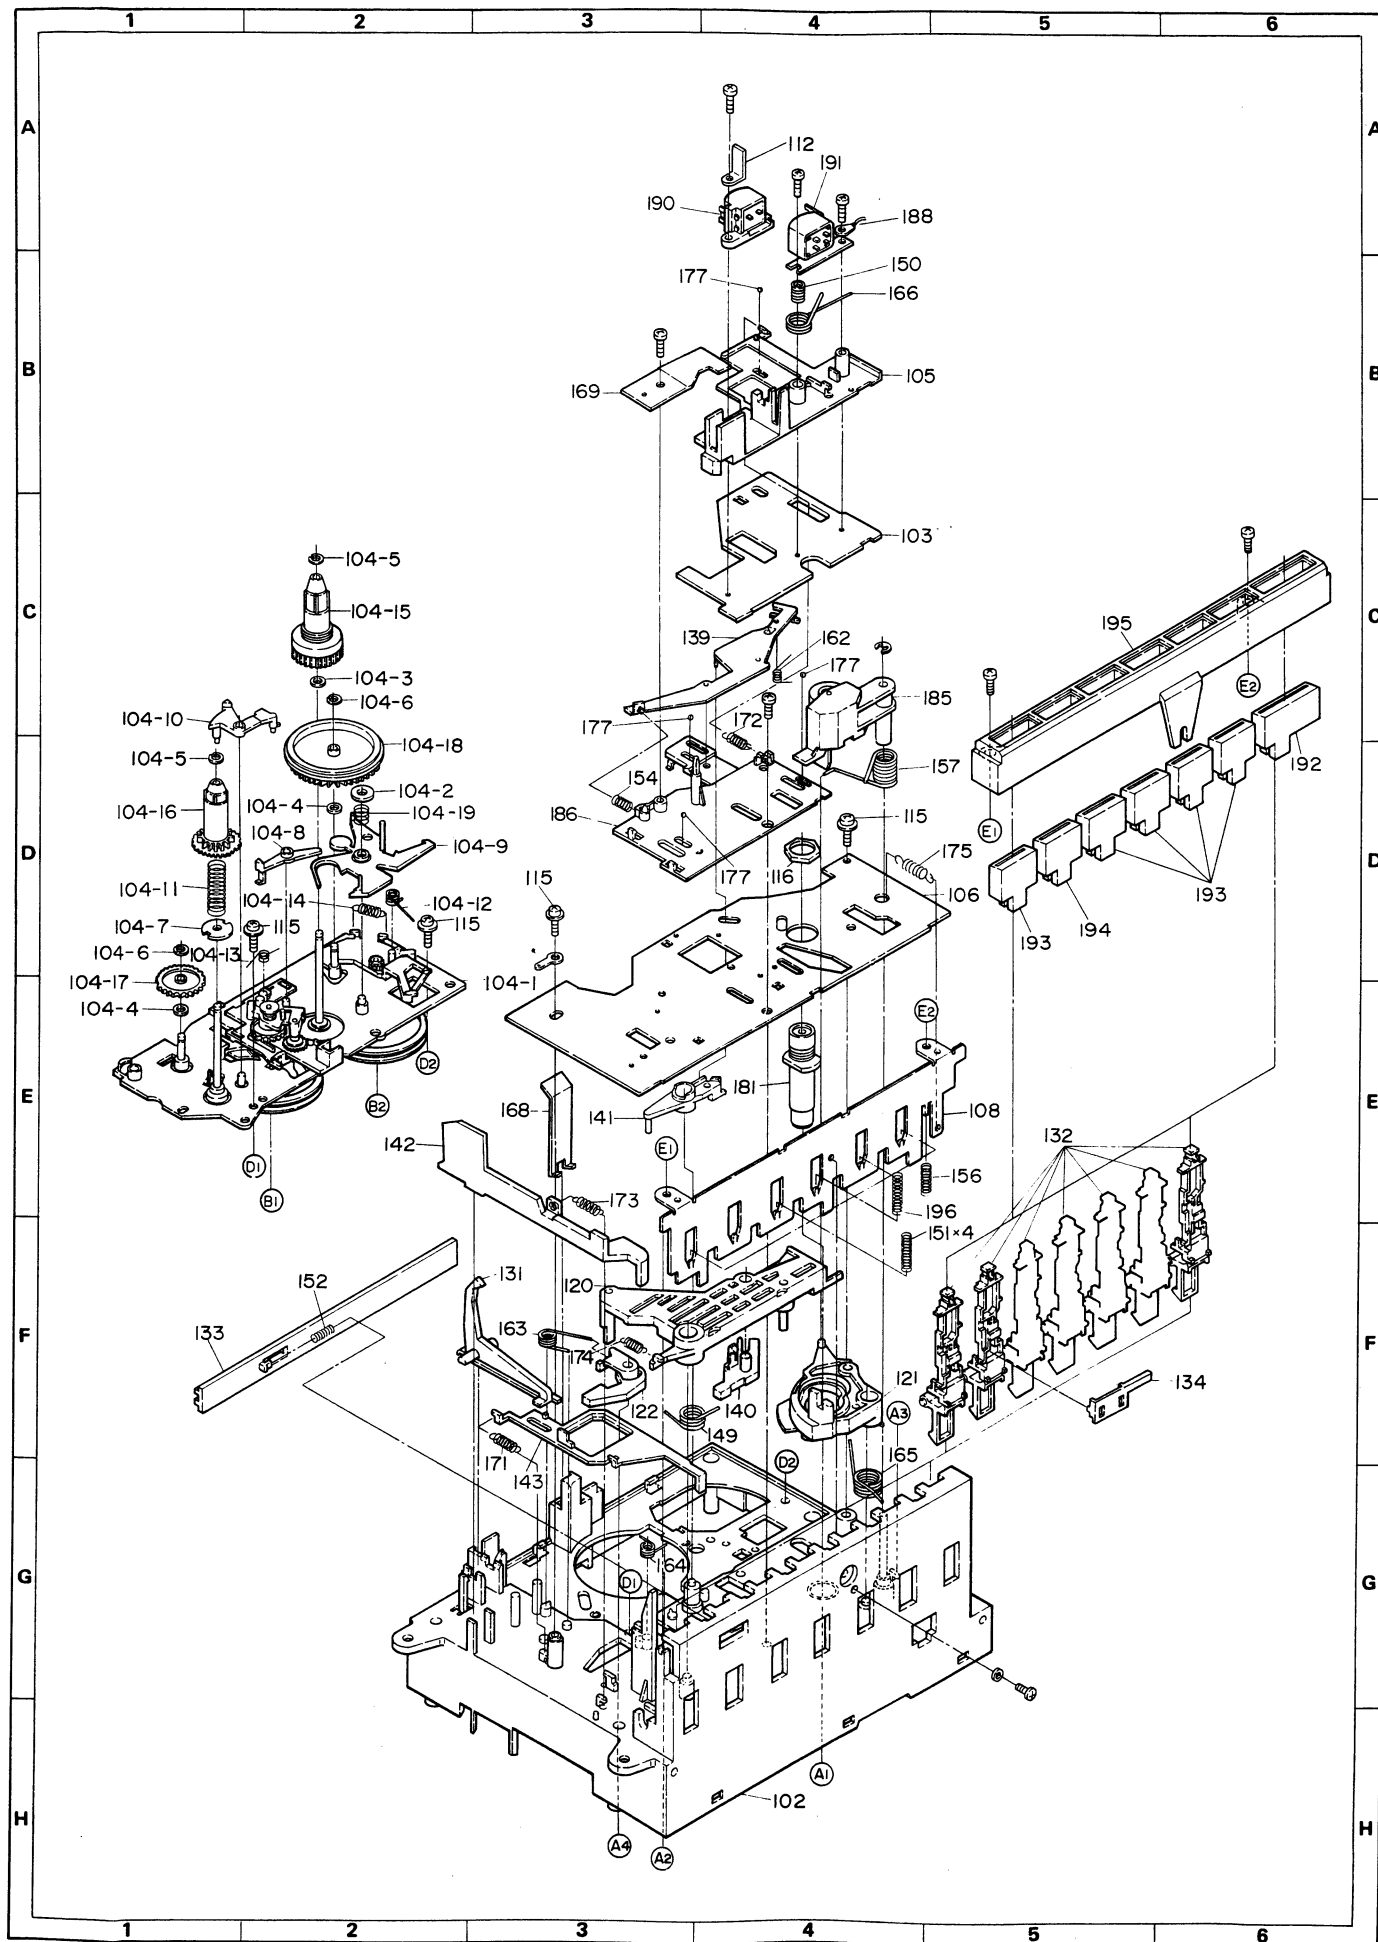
TAPE MECHANISM EXPLODED TOP VIEW
